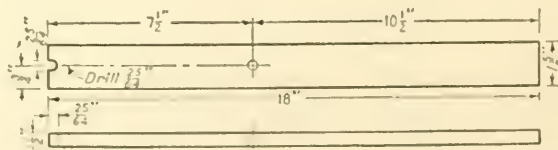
Extra support board for front throat-spring bracket, Massey-Harris corn binder
